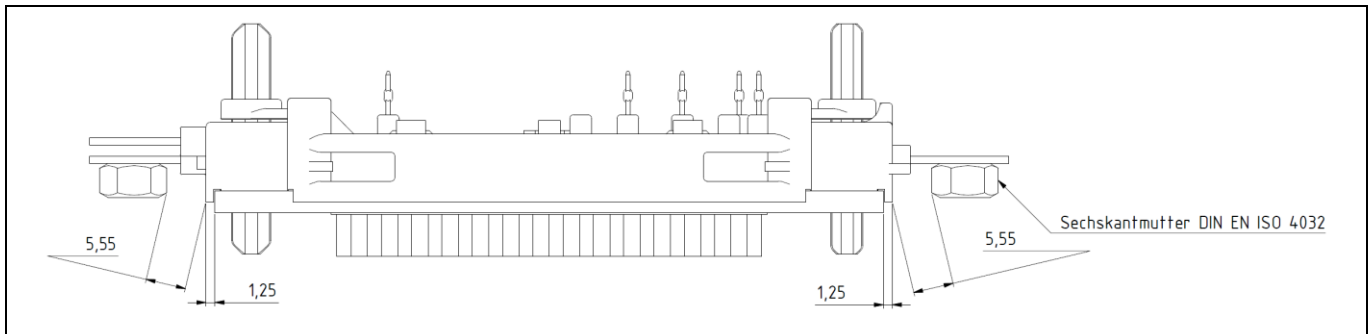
HybridPACK™ Drive with a hex nut (ISO 4032) for the power tab connection. The clearance shown in the drawing is uncritical as it is higher than the minimum product clearance itself of 4.5mm.
